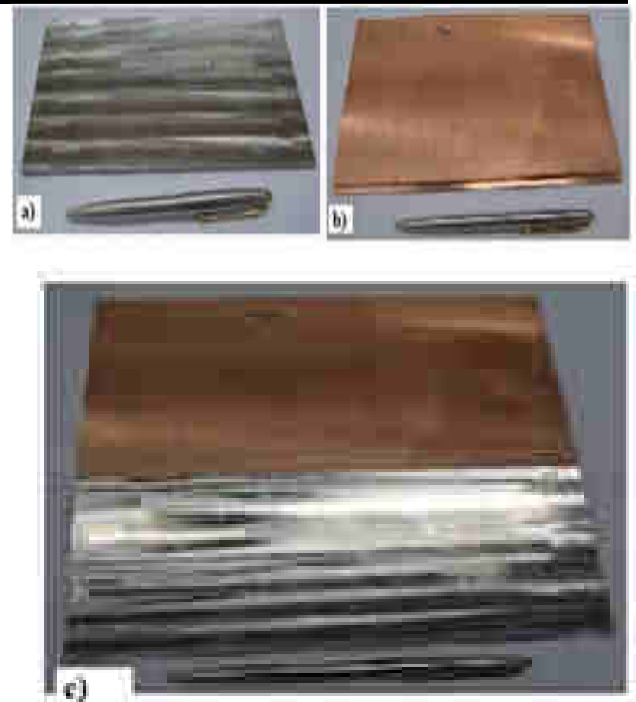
Specimen sample before welding, a) Stainless steel sheet b) Russian copper sheet c) specimen after mating as per weld condition
